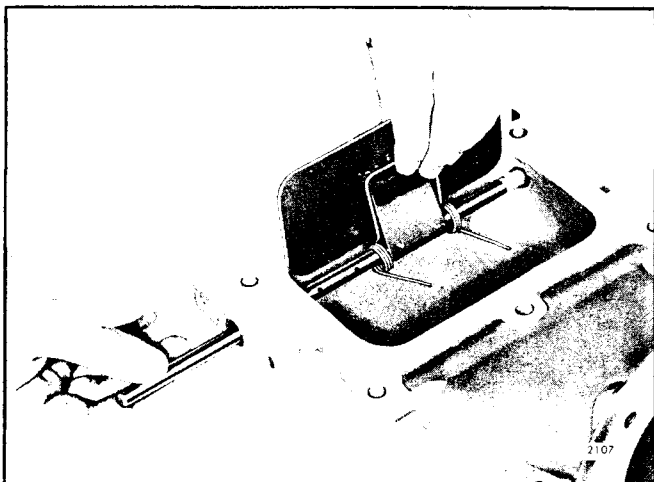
Installing Air Shut-Off Valve Spring and Valve
